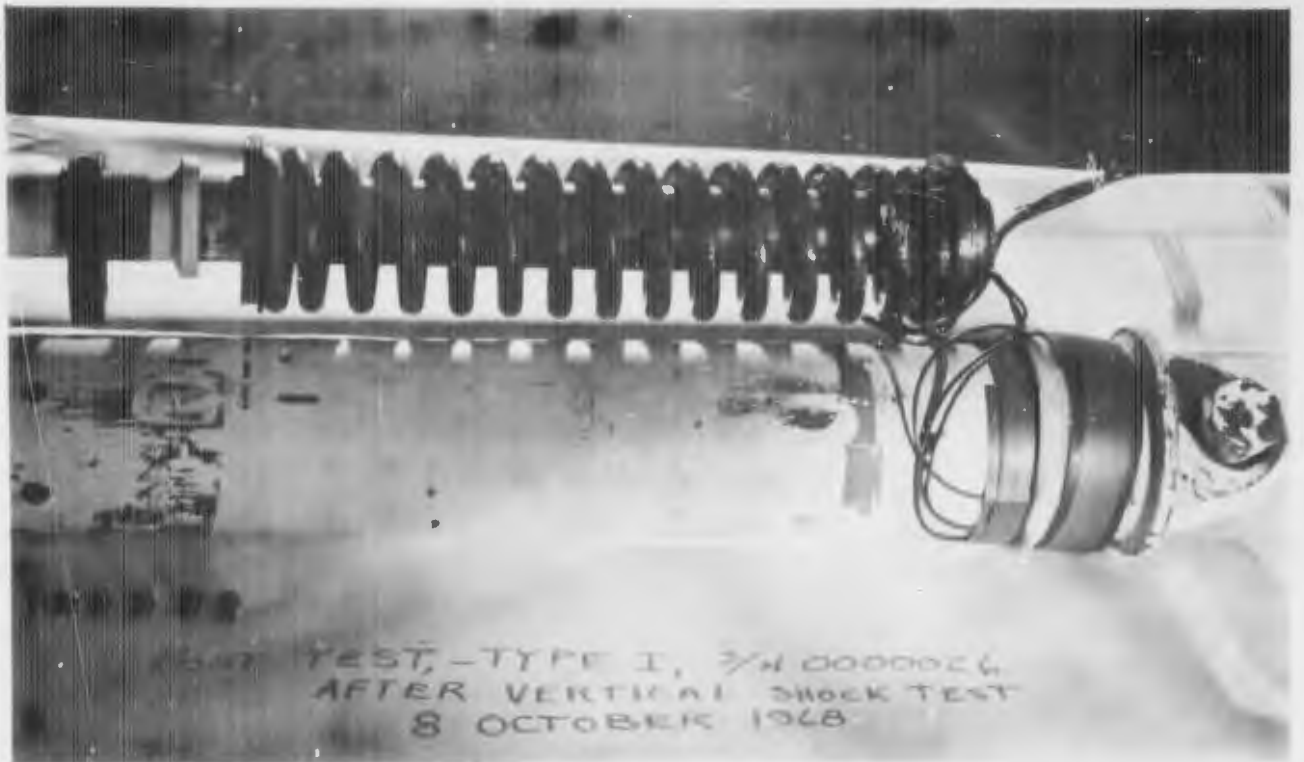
Type I, S/N 26, Post-Test Inspection of Spring Assembly
